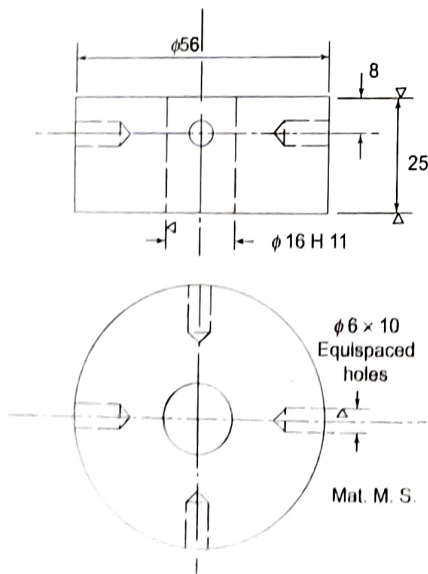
Workpiece for rotary indexing jig in Fig 4.4b
